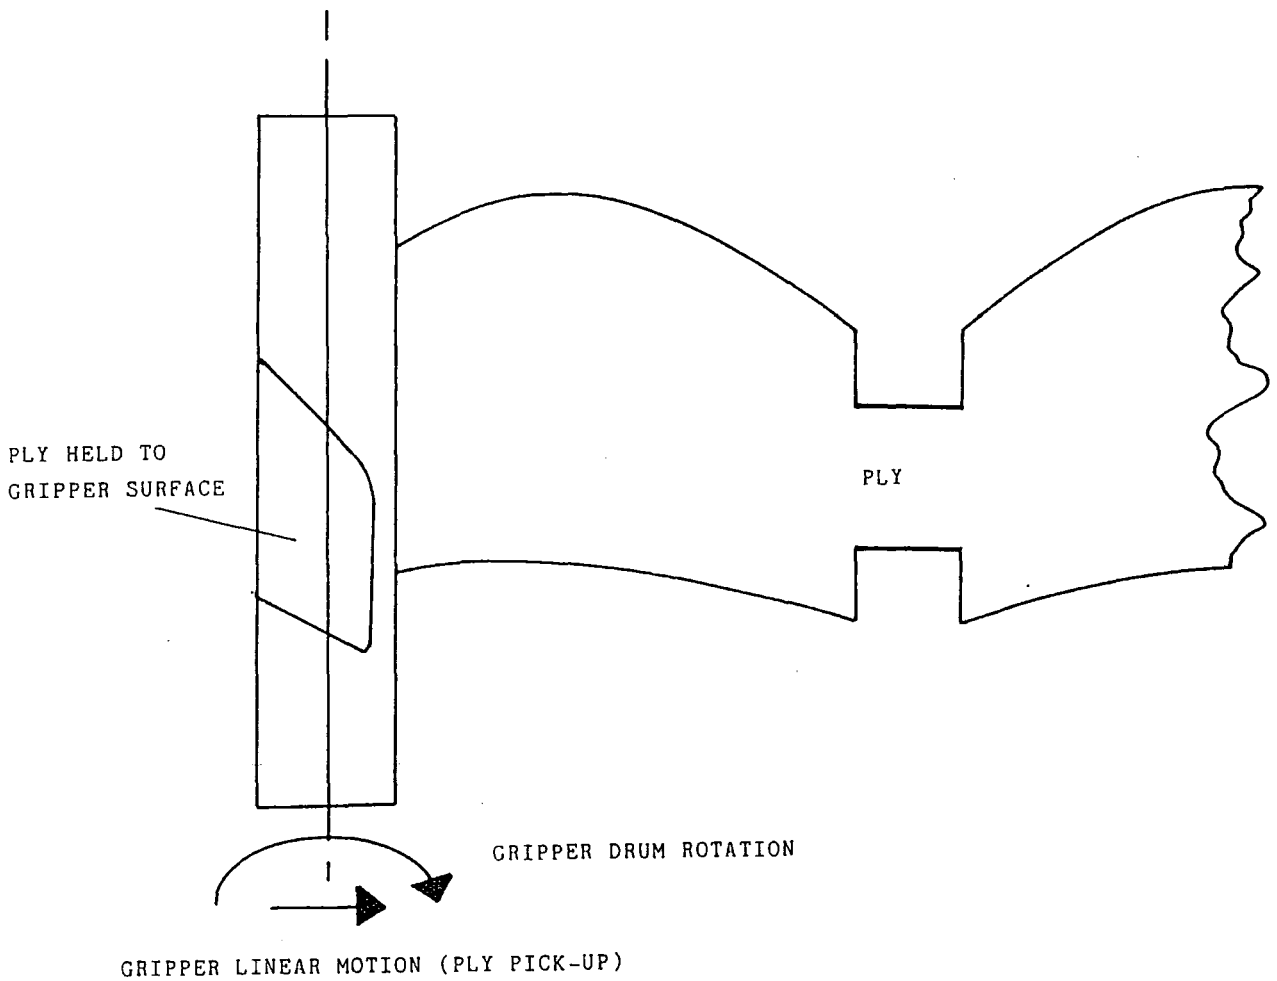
Basic Principle of a Cylindrical Gripper Head
